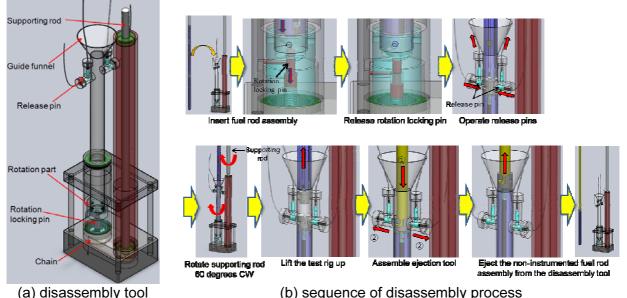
Modeling of the disassembly tool and sequence of disassembly process
